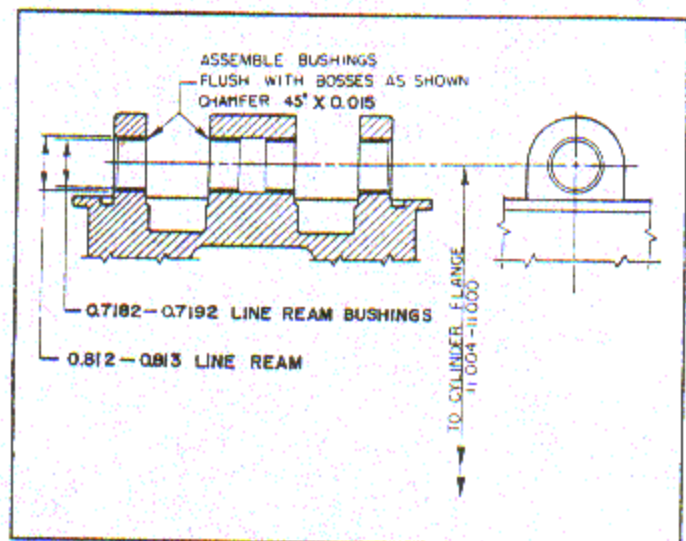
Dimensions of Rocker Shaft Support Bushings
